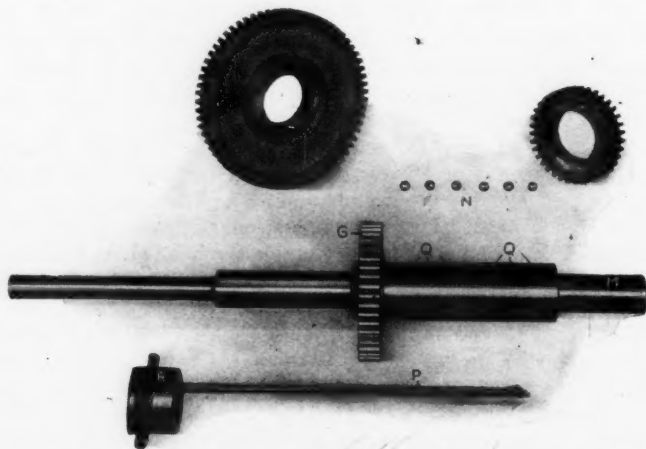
Detail View of Ball Clutch which operates Table Feed and Work Speed
